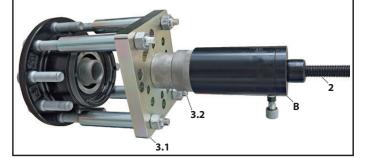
Position the adapter plate "3.1" over hole pattern F.
